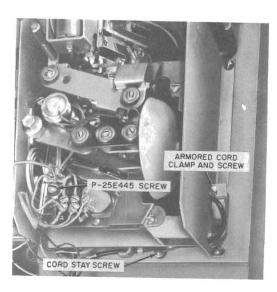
Location of Cord Stay Screw and Cord Clamp
